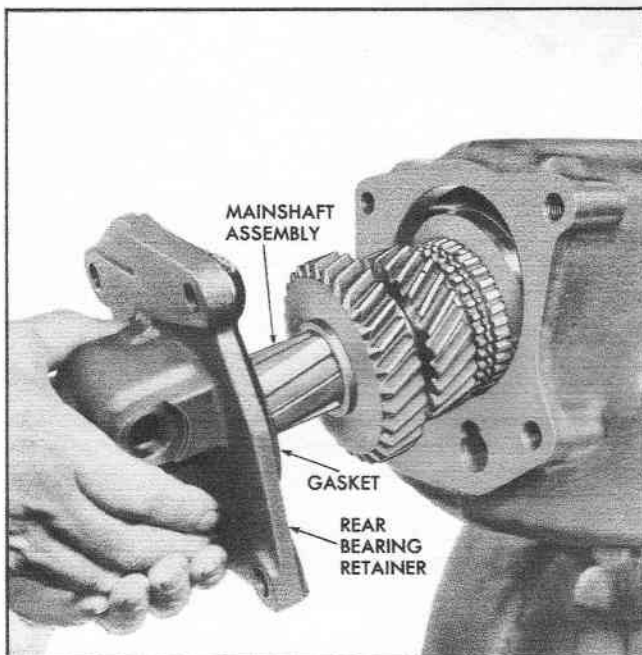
Removing or Replacing Rear Bearing Retainer and Mainshaft Assembly
